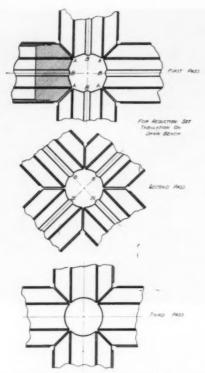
ROLLER DIES FOR PRODUCING SHELL FORGINGS WITHOUT FINS
